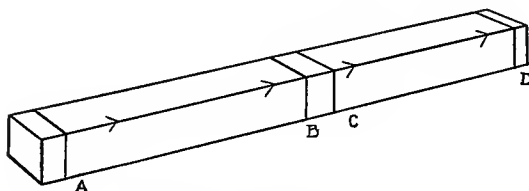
Cross-Pieces of Bench-Hook, Planed and Laid Out Ready for Sawing to Lengths
